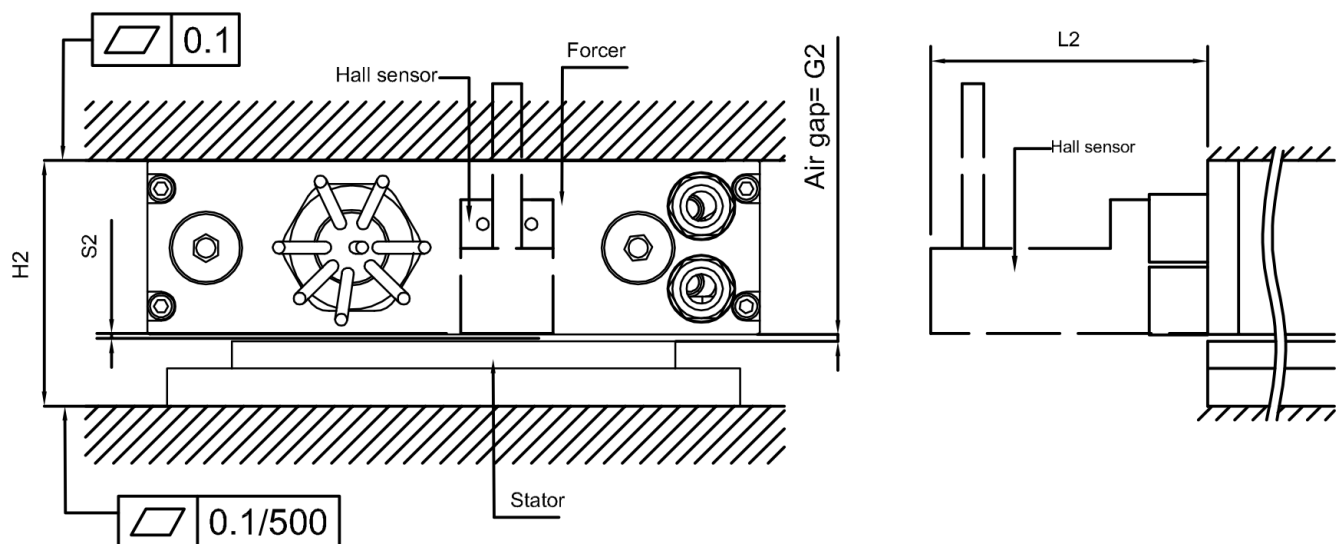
LMFP water-cooling linear motor assembly
